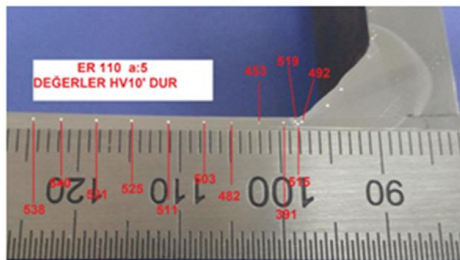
Hardness values of the sample with 3 mm welding height (horizontal line)
